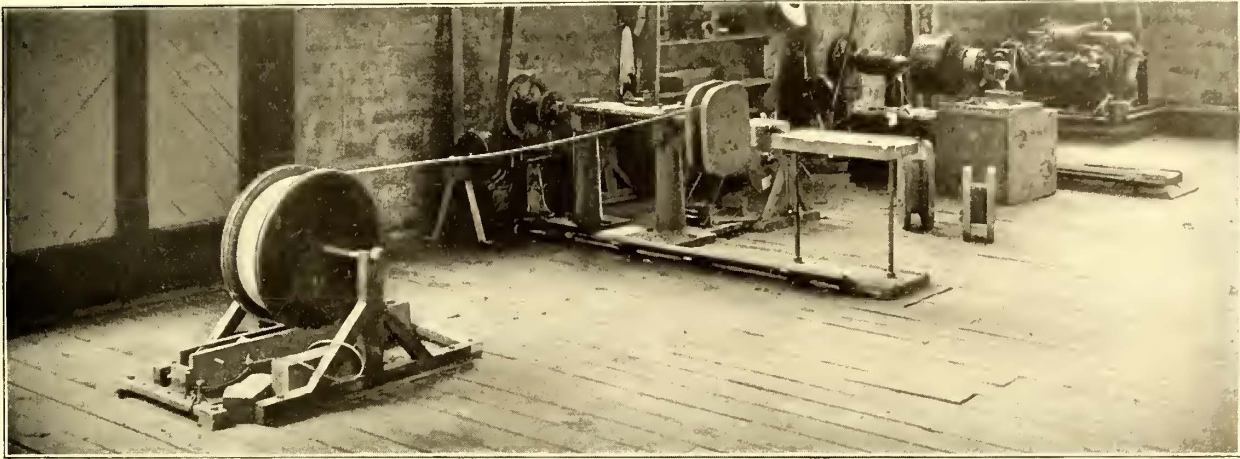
LATHES FOR WINDING FIELD COILS AND PLACING BINDING WIRE ON ARMATURES
